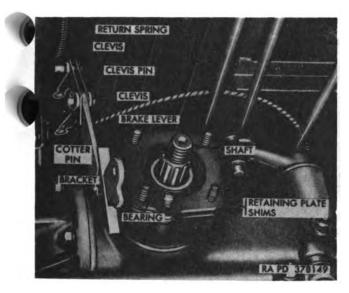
Shaft bearing and adjusting shims after removal of brake—MS74A3.
